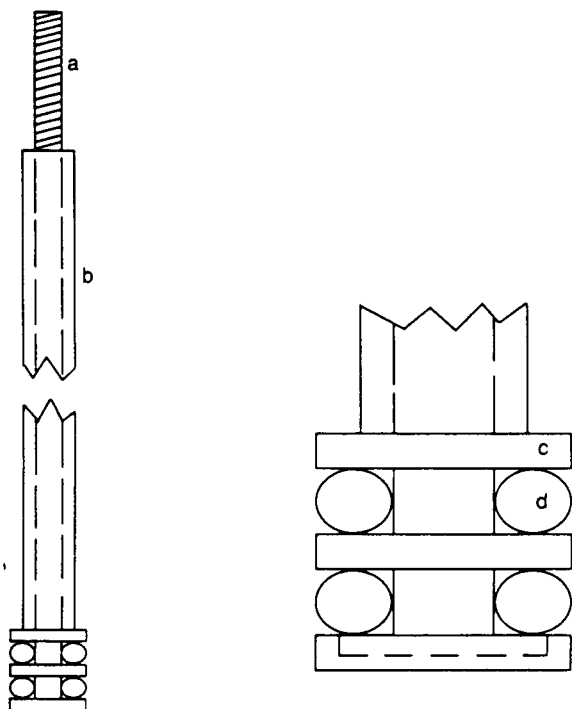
Structure of the driving piston. a = Inner threaded tube; b = outer pushing tube; c = washer; d = O-ring.
